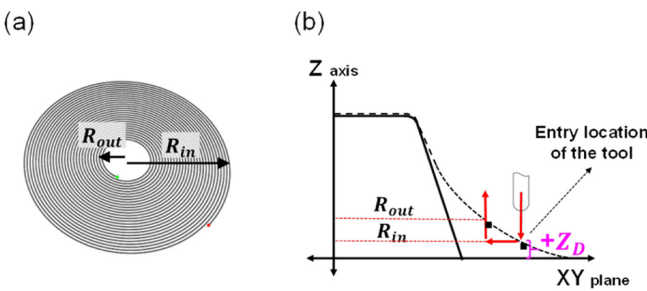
(a) Tool path and (b) Parameters of disk shape in incremental forming to reduce section deflection
